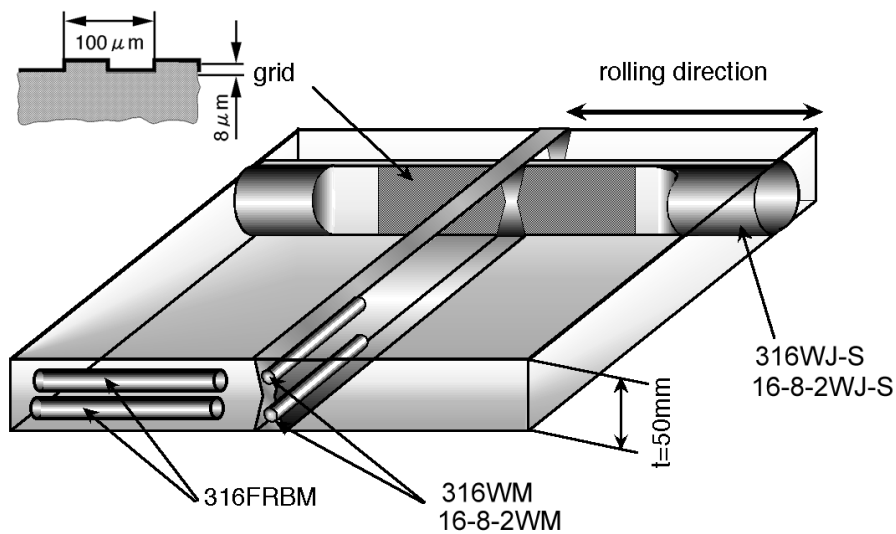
Sampling of test specimens from welded joint.
